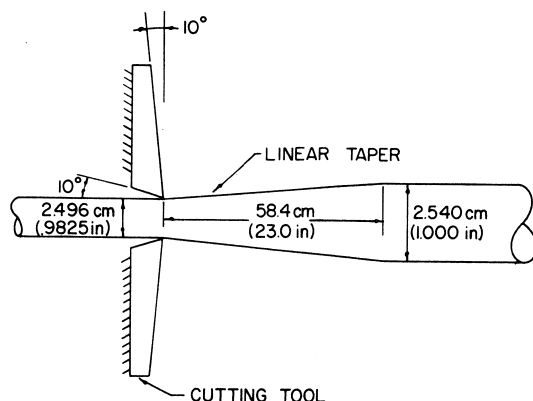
Tapered rods used in the capitol subway design (material 6061-T6 aluminum).
